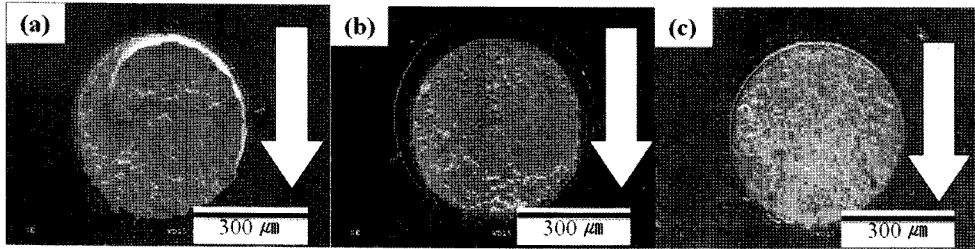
Fracture surfaces of the BGA solder joints after high speed shear test: (a) ductile mode (b) mixed mode (c) brittle mode
